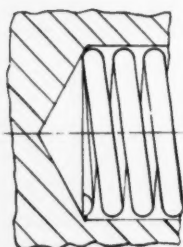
A spring with ends closed and ground square will evenly seat itself in the bottom of a drilled hole, as clearly indicated by means of this cross-sectional sketch.
